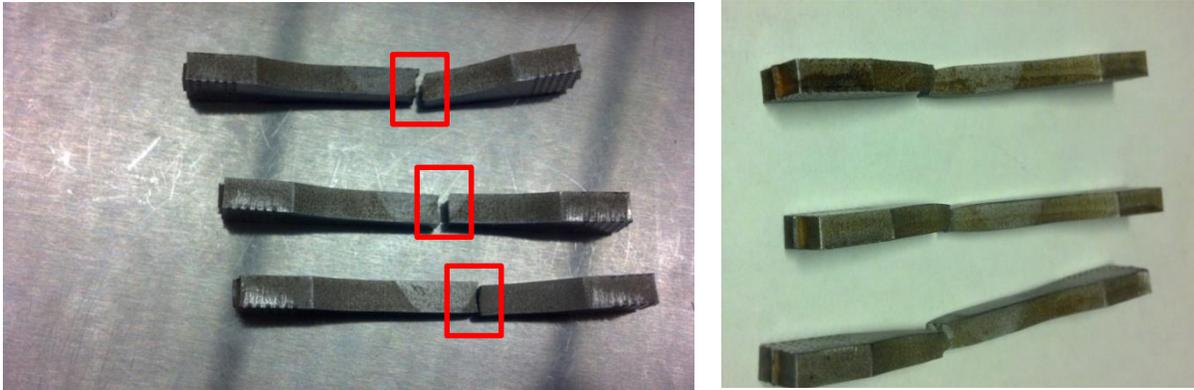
Tensile samples in welded plates that failed outside of the weld.
